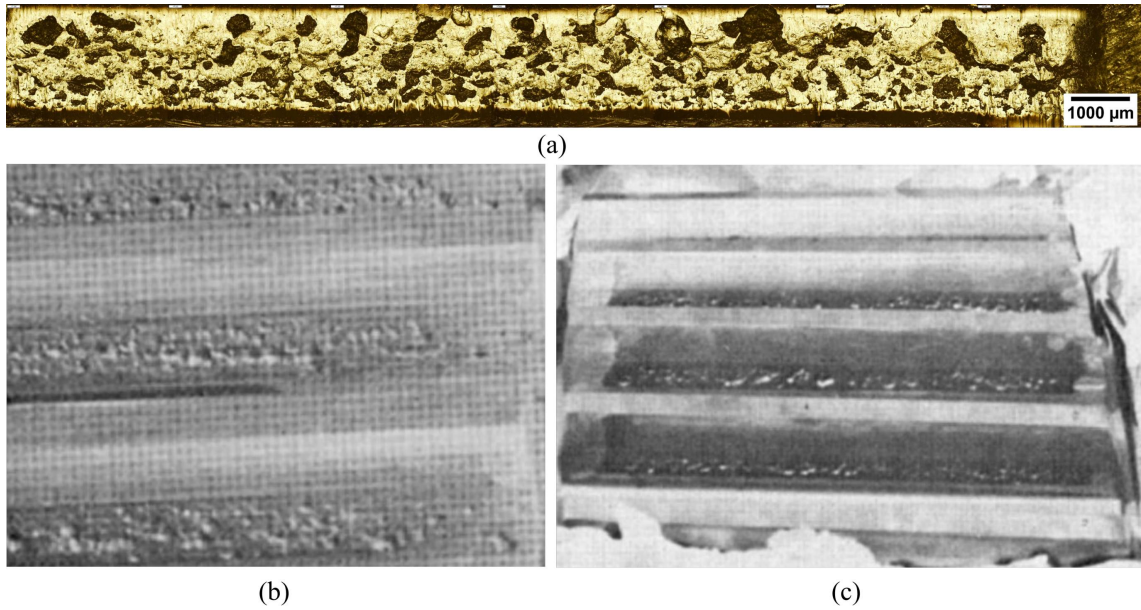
(a) A mould image of a gear surface worn by macropitting in the lubricated test, (b) and (c) the references in [29].
